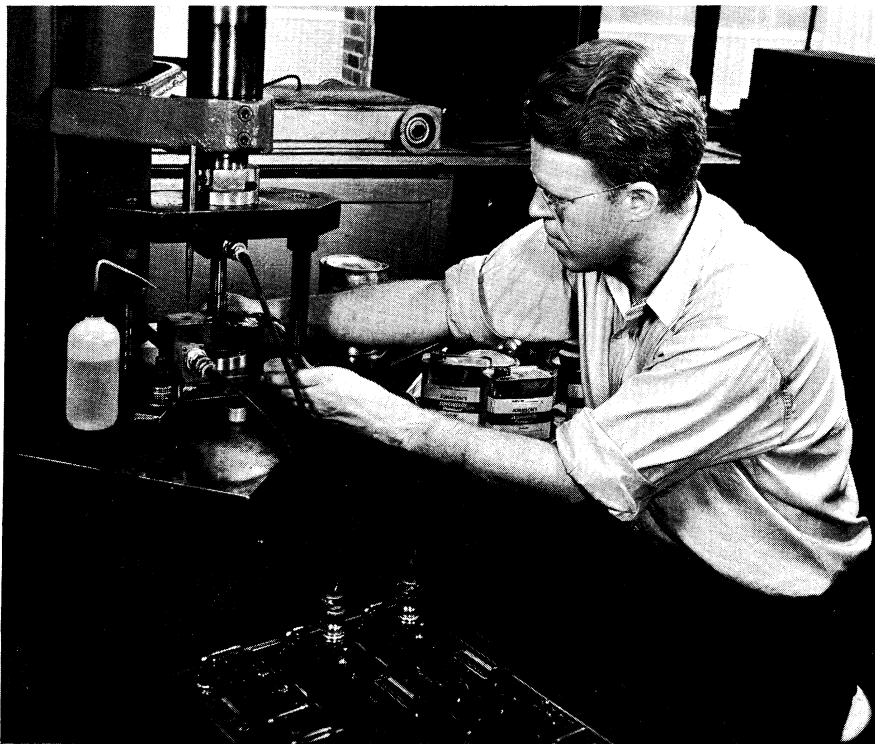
A laboratory drawing die set-up in a hydraulic press, for drawing sheet metal cups. Electrical instruments provide continuous records of punch motion and velocity, drawing force, blank hold-down pressure and radial force on the draw die.
